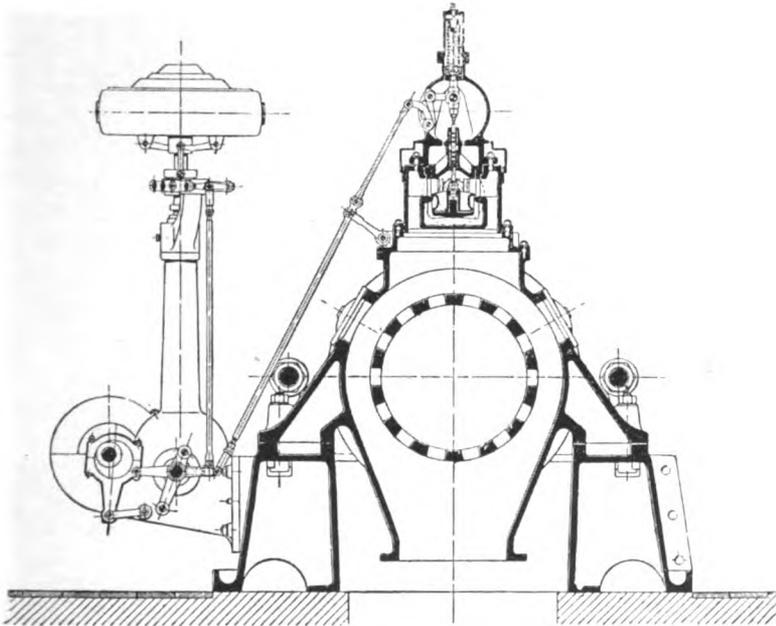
Transverse section through Cylinder and Valve Box, Oechelhäuser Engine.
